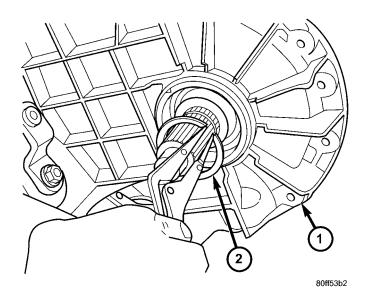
Install Front Output Shaft Bearing Inner Snap-Ring
